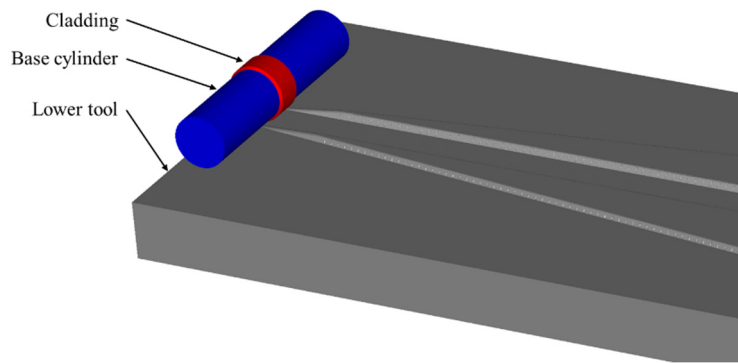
CAD model of hybrid work piece and lower cross-wedge rolling tool as FEA input.
